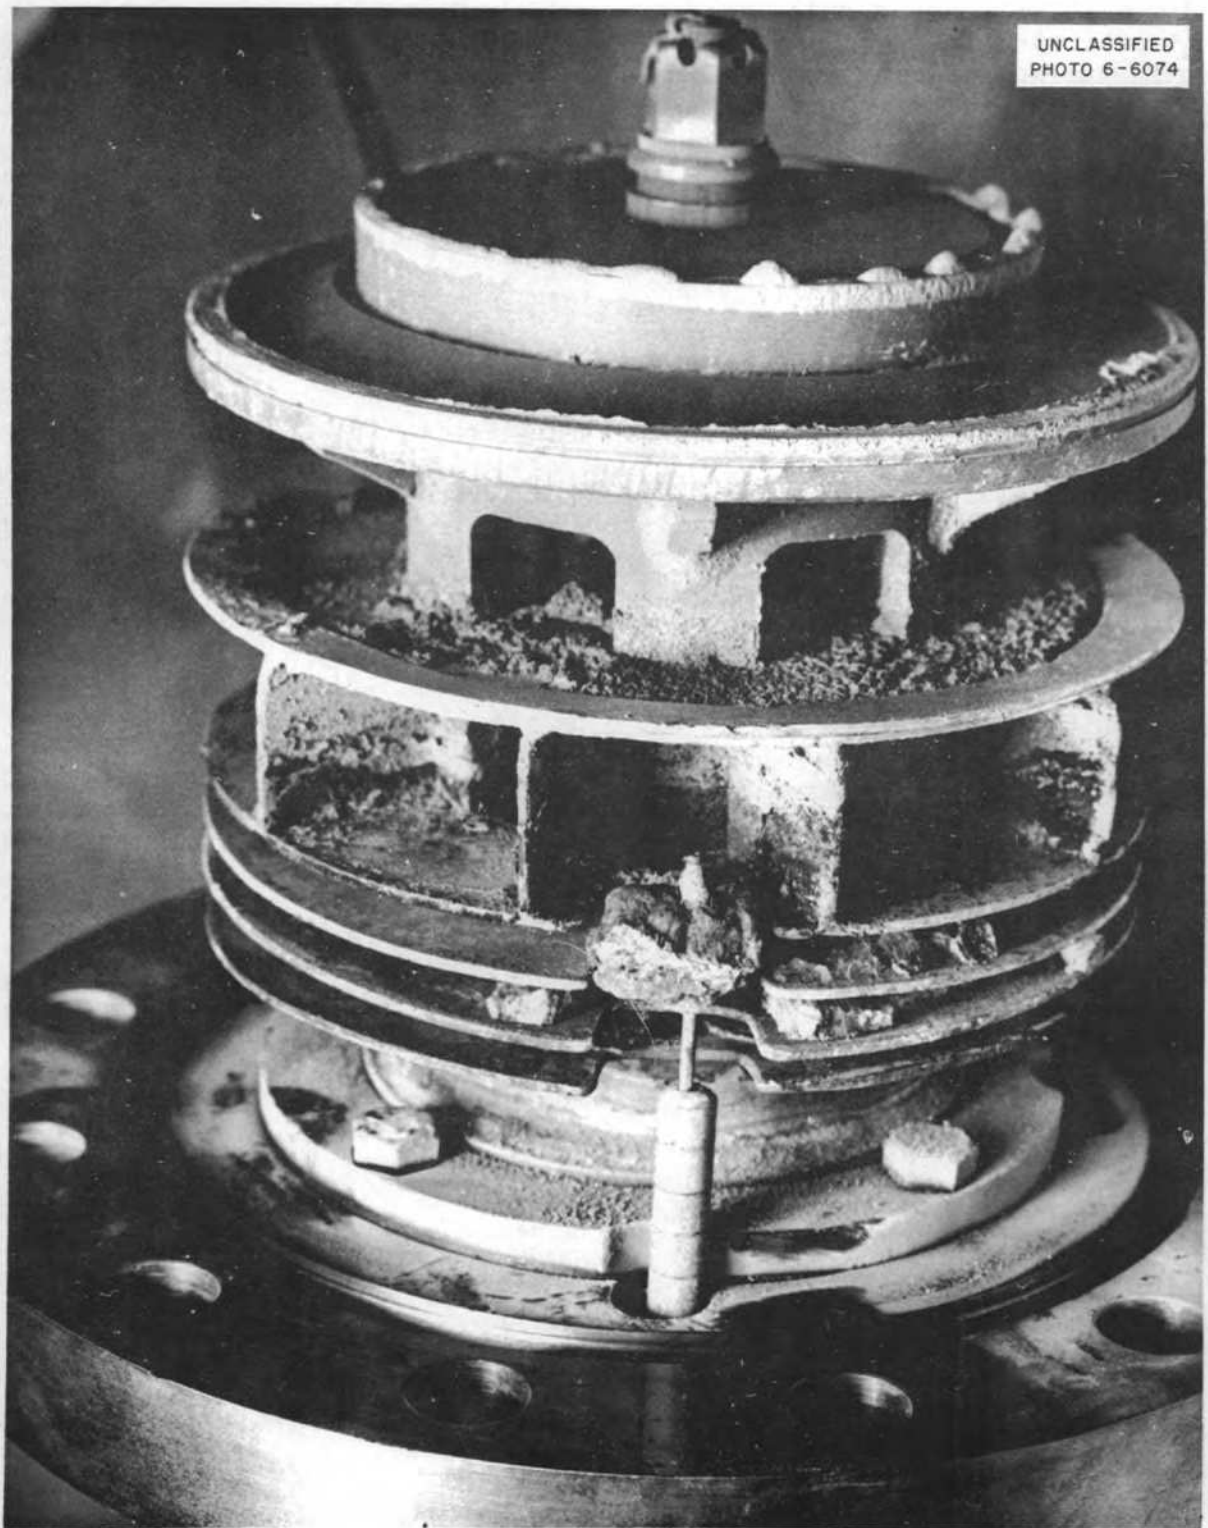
Gas-Seal Pump Assembly After Operation.
